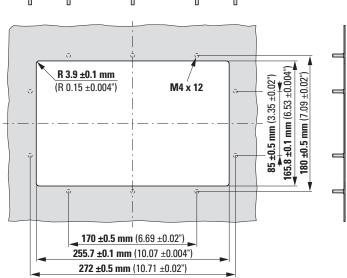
Dimensional drawing for mounting XV-313-10-..
